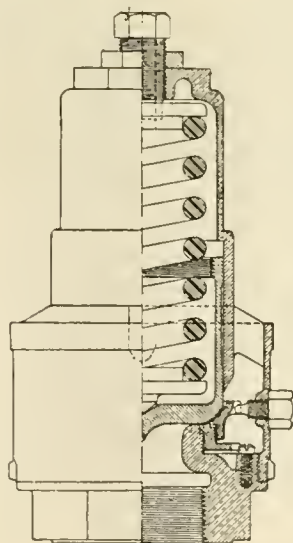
SECTION VIEW OF IMPROVED SAFETY VALVE FOR LOCOMOTIVES.
